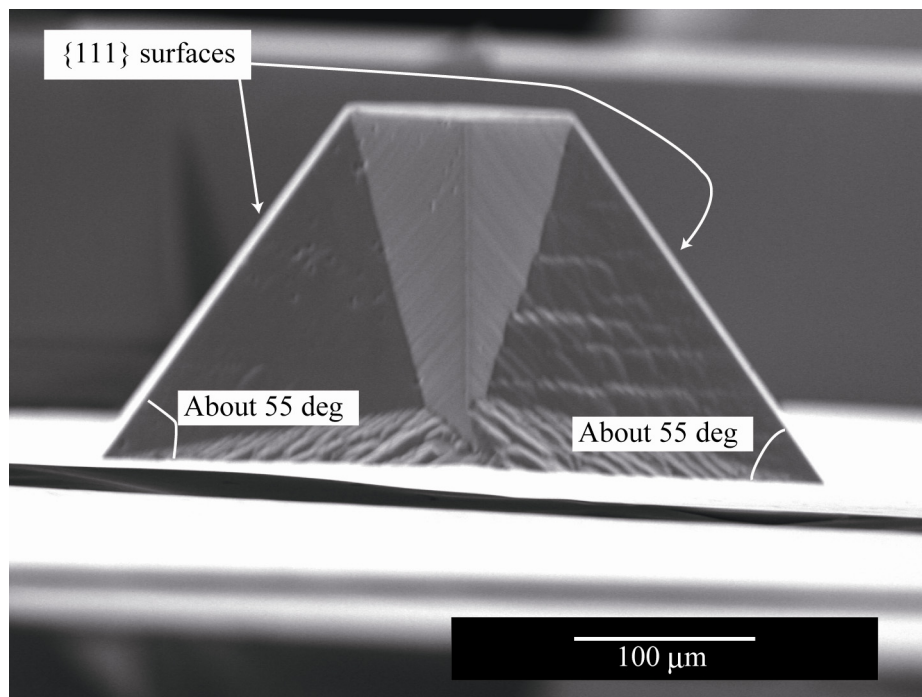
Side view of a fabricated convex alignment structure on a drive part.
